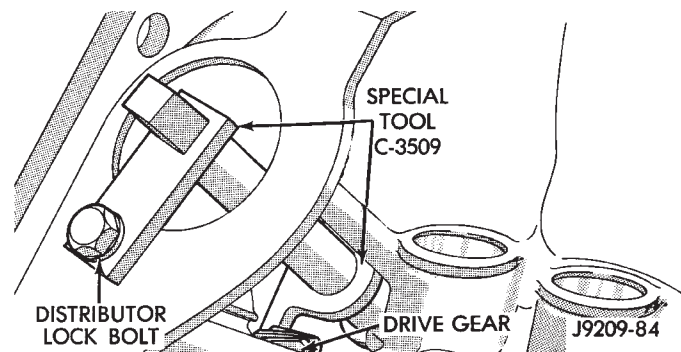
Camshaft Holding Tool C-3509 (Installed Position)
